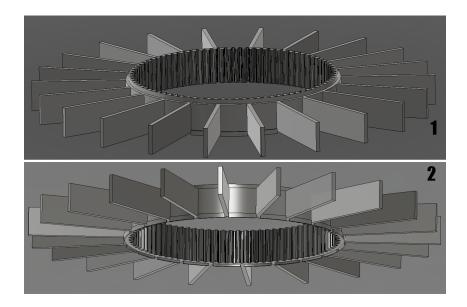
Lower mill. 1 view from above. 2 view from below
